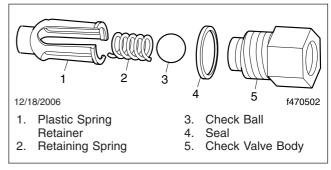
, Check Valve Assembly, Fuel Pro Configurations
